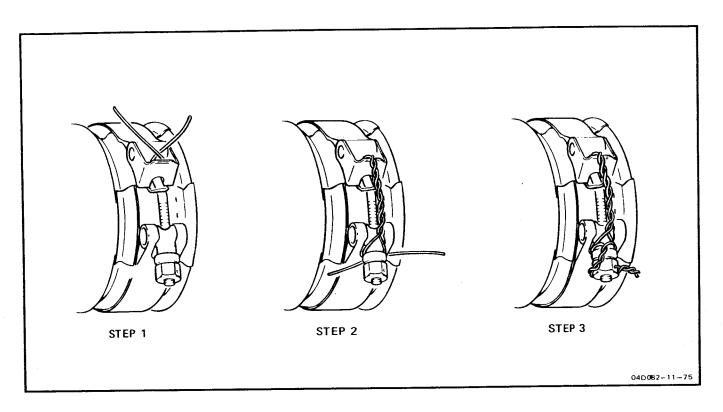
A. Hydraulic Pump Clamp Lockwire Method
